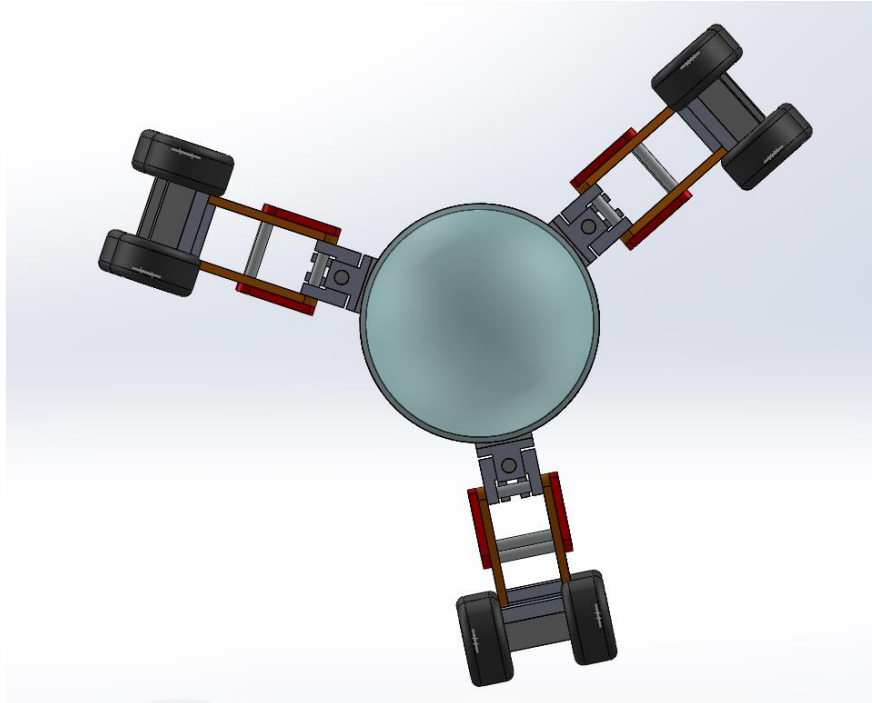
The Front Plane View of the Designed Pipeline Inspection Robot
